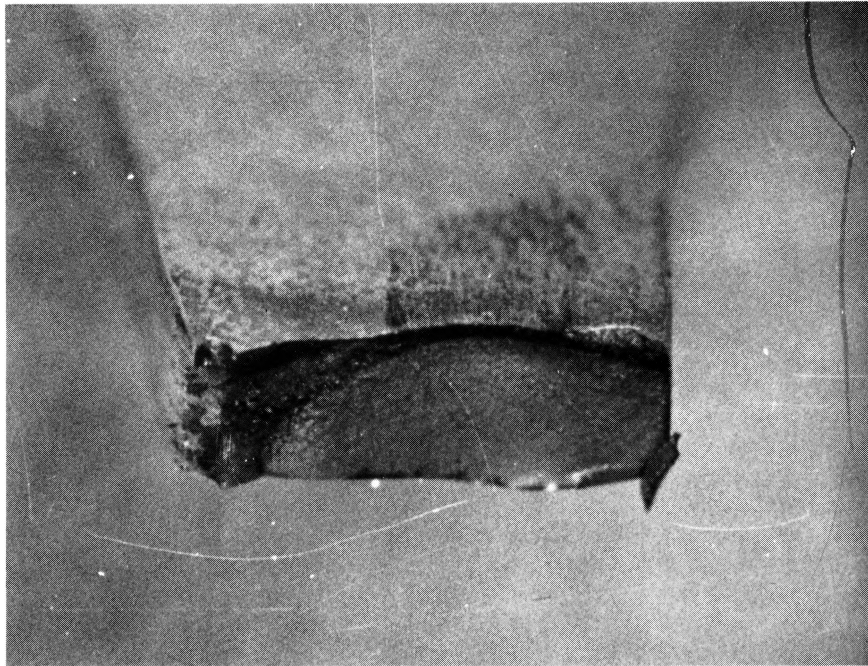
Fracture surface of martensite vacuum fretting fatigue specimen 8-68 (2,813,990 cycles).
